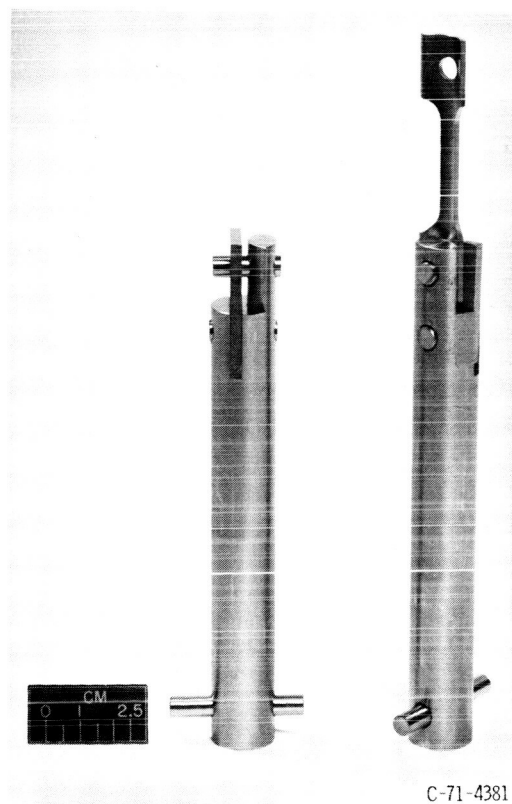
Tubing section tensile-test specimen and grips used to test unlined and tungsten-lined T-111 tubing.
